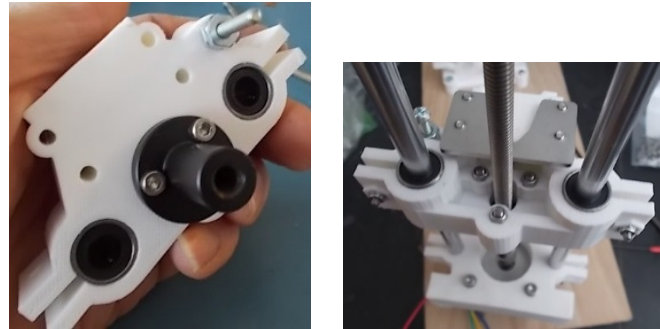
Views of carriage assembly. On left, a view from back showing drive nut and linear bearings. On right, a front view, showing stainless steel plunger support and the nuts that hold the drive nut.
